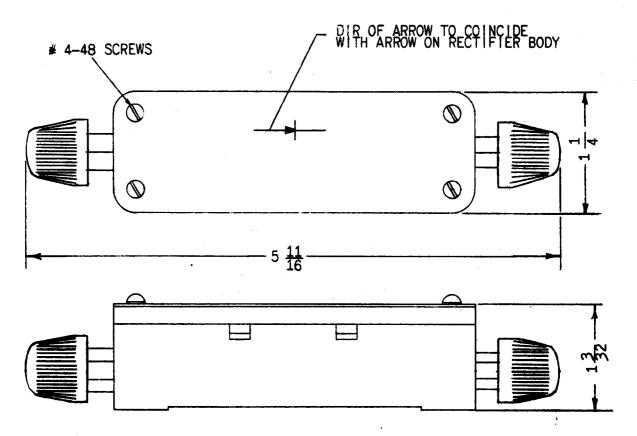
(01 $\dot{4}$ 8A2994) Outline Dimensions For Test Rectifier
